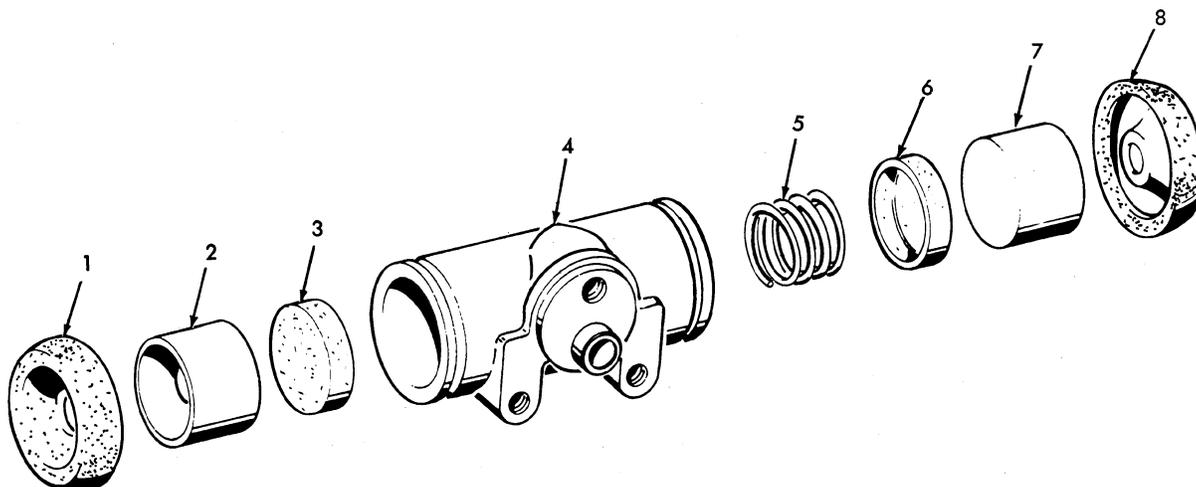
Front and Rear Wheel Cylinders - Exploded View (T-72576)
